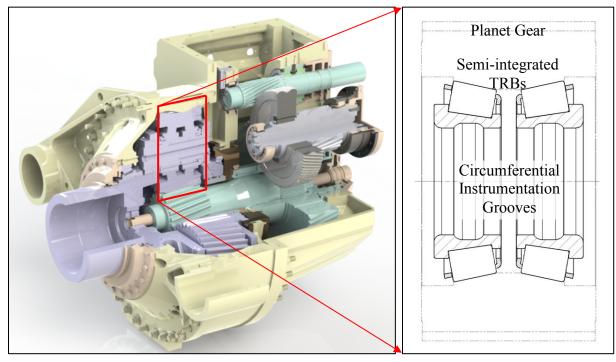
Gearbox 3 planet bearings. Illustrations by Romax Technology (left) and Timken (right)
